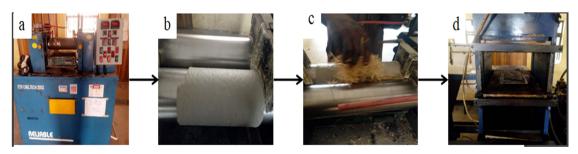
Composite production process; a) Two roll mill machine b) PP compounding c) Mixing PP with Sisal fiber d) Compression Moulding Machine
